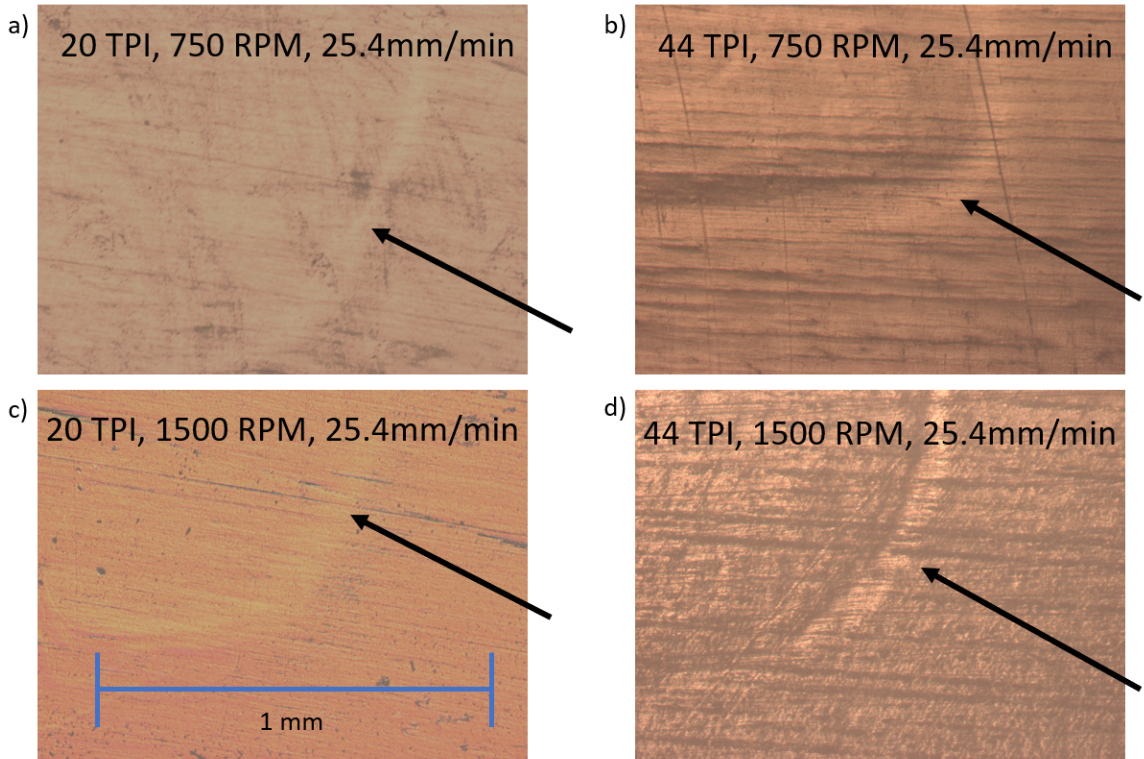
Micrographs of weld cross sections located at the bottom of the weld retreating side. The arrows point to defects at the weld zone interface. a) Run 1. b) Run 2. c) Run 3. d) Run 4.
